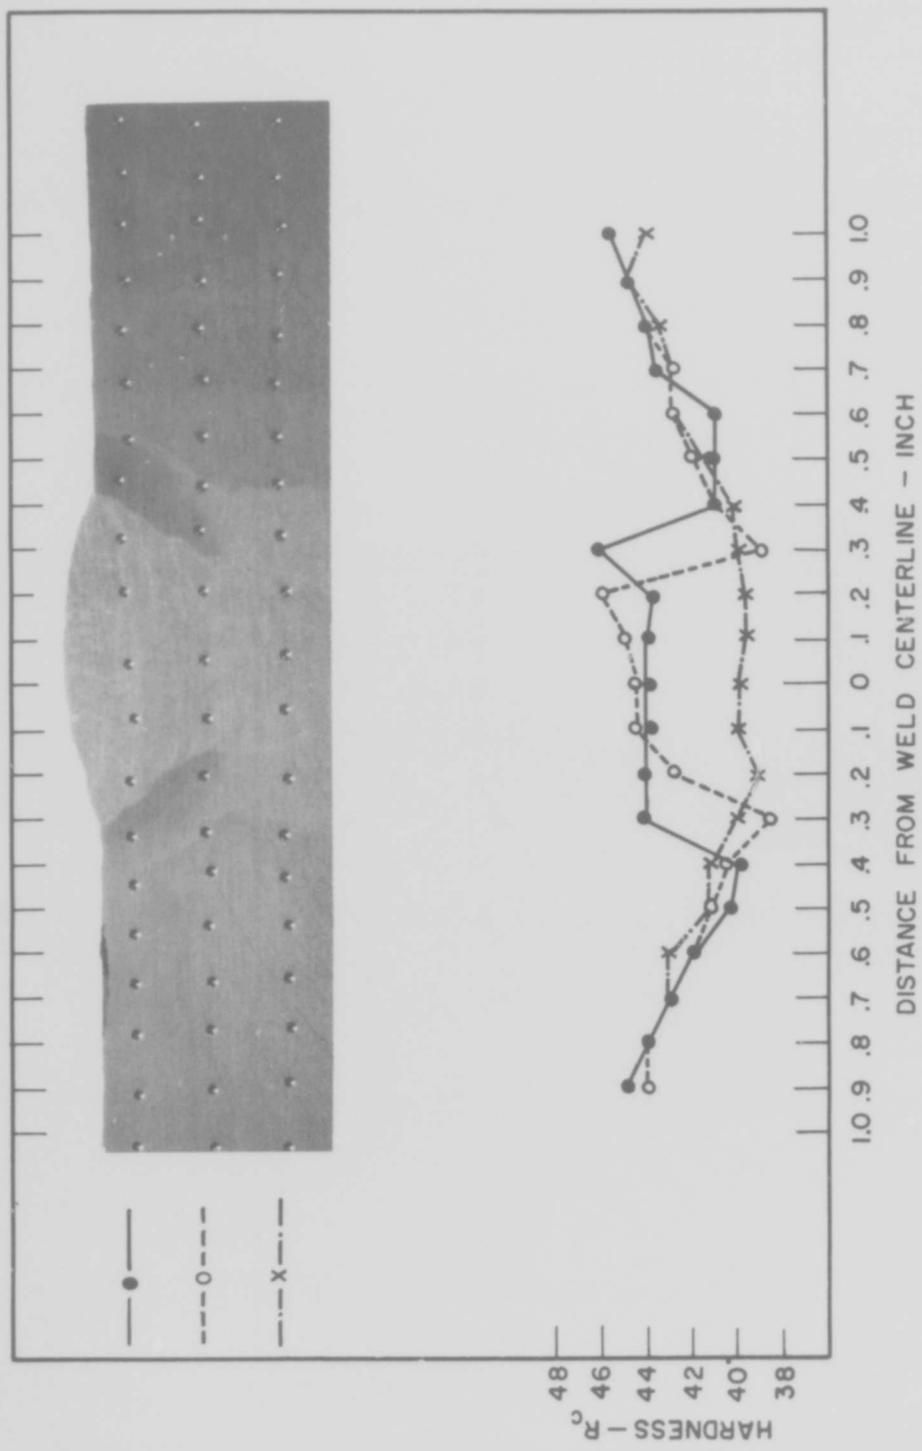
Hardness Survey of Multipass TIG Weld No. 0275 Made in HP 9-4-45 1/2-Inch Plate Using a 525°F Pre- and Post-Heat.
